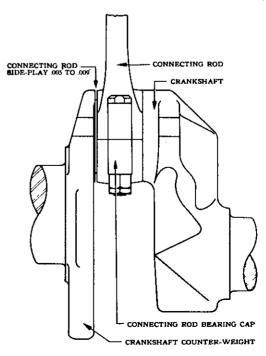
CONNECTING ROD SIDE CLEARANCE
